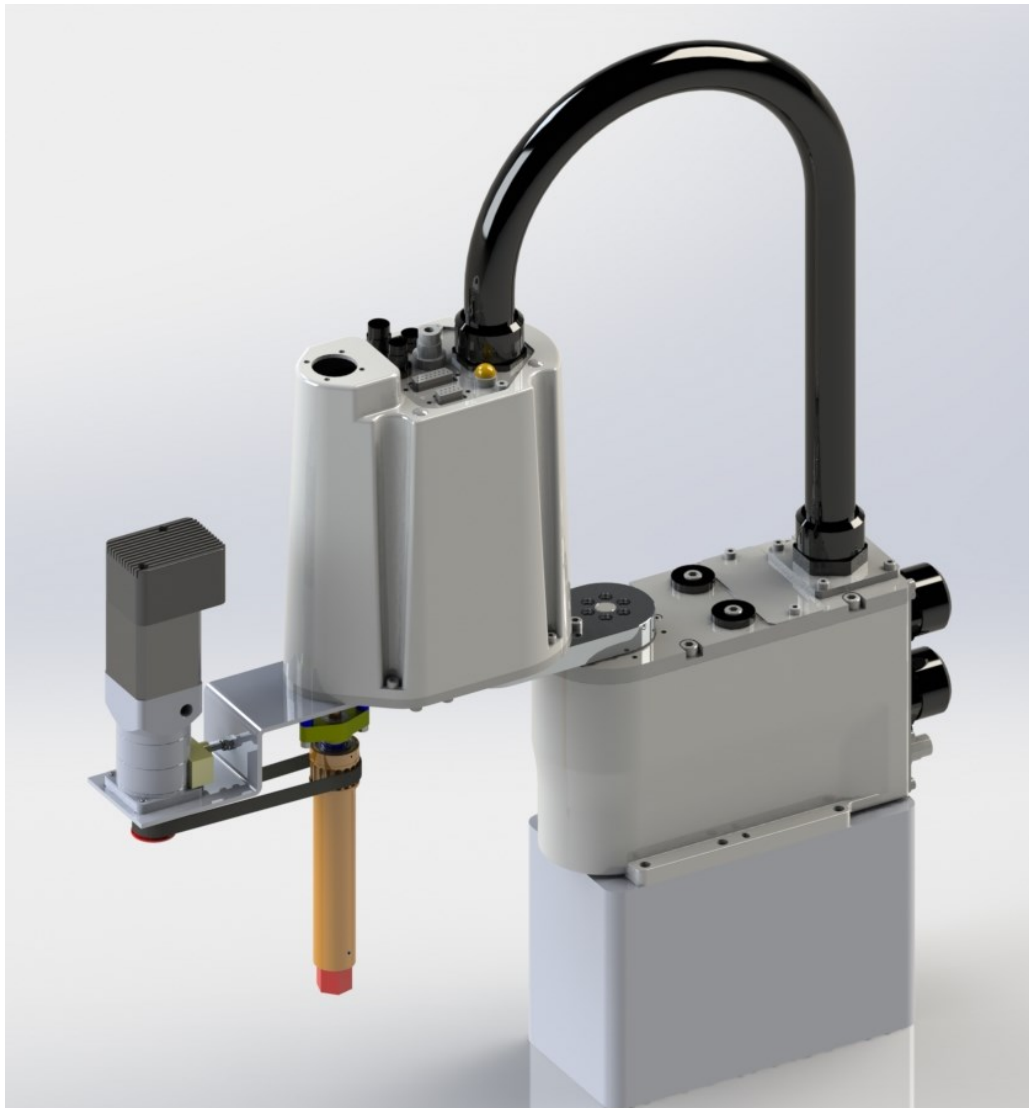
Single-armed SCARA tuner (isometric front view).
